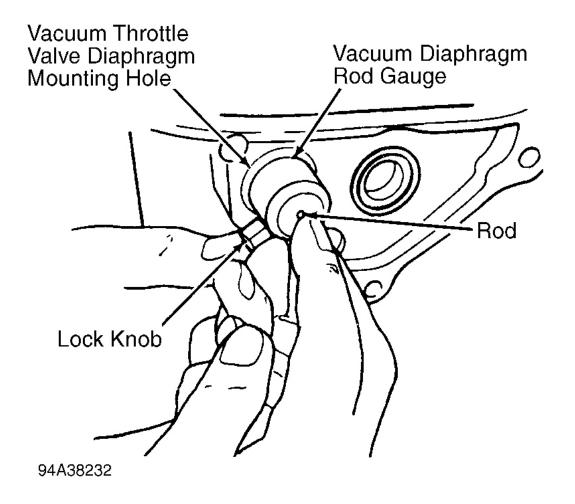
Identifying Vacuum Diaphragm Rod Gauge Courtesy of FORD MOTOR CO.
